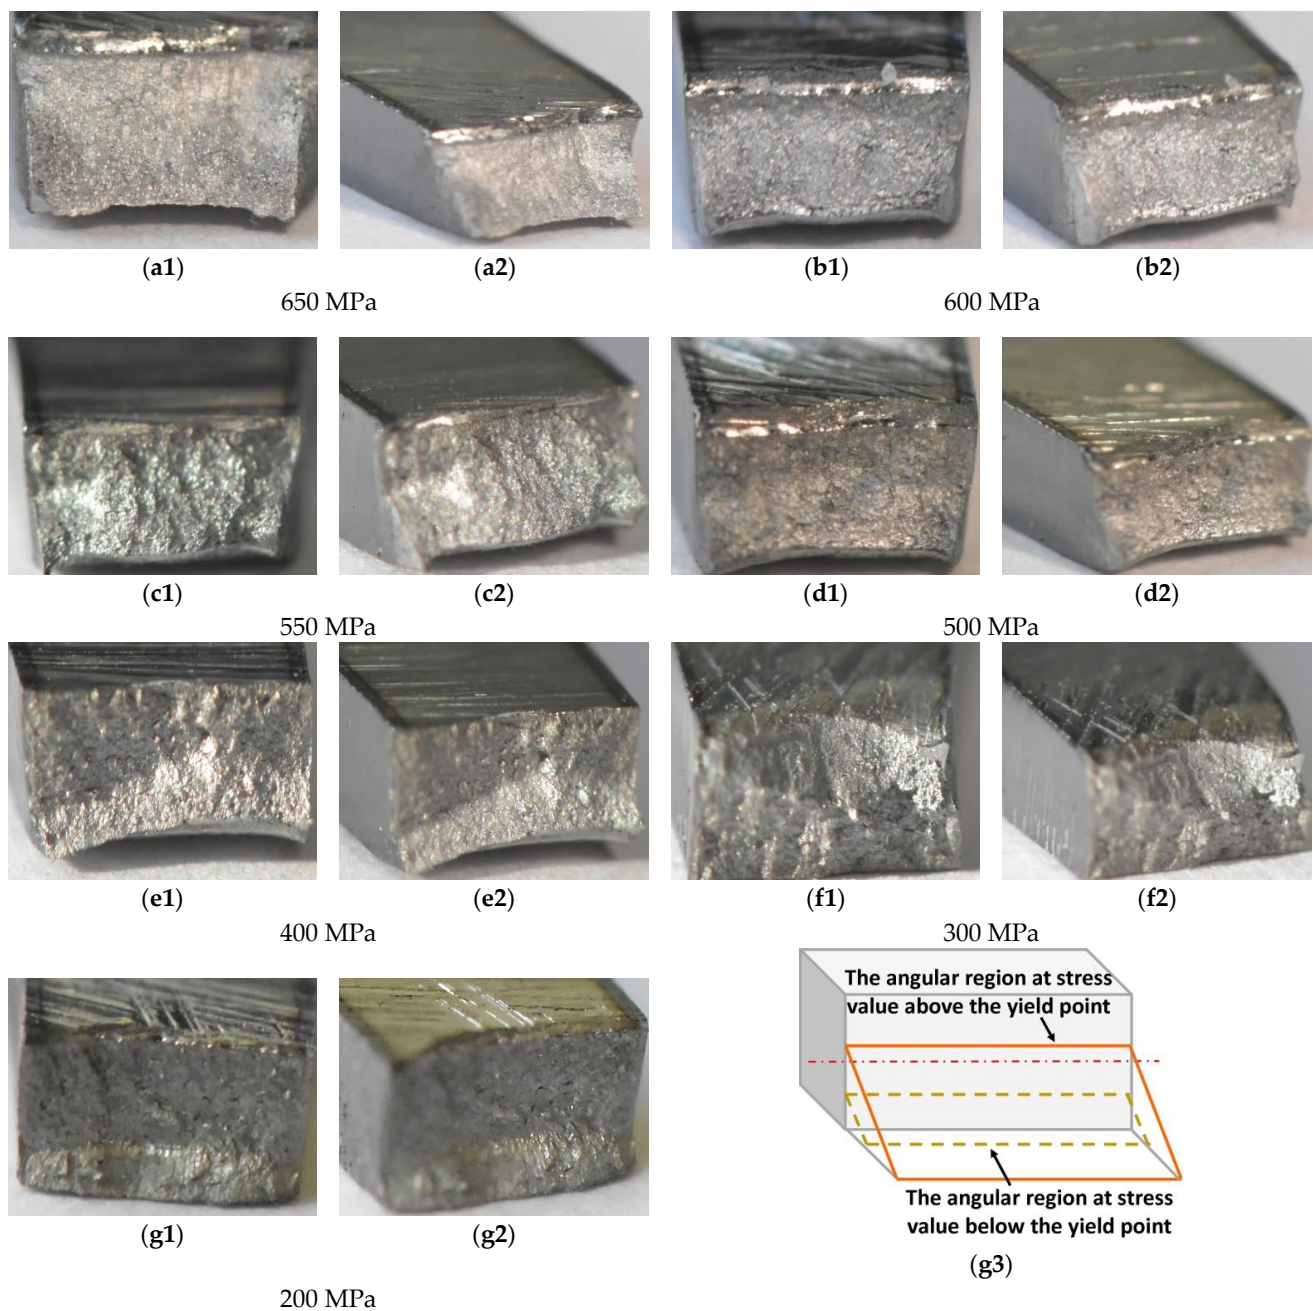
Fracture regions (a1–g3) of S960MC weld manufactured at micro-jet cooling technique after fatigue tests for the maximum values of axial stress amplitude of 650 MPa–100 MPa and the fracture scheme (g3), number 1 represents a perpendicular view while number 2 follows an axonometric one.
